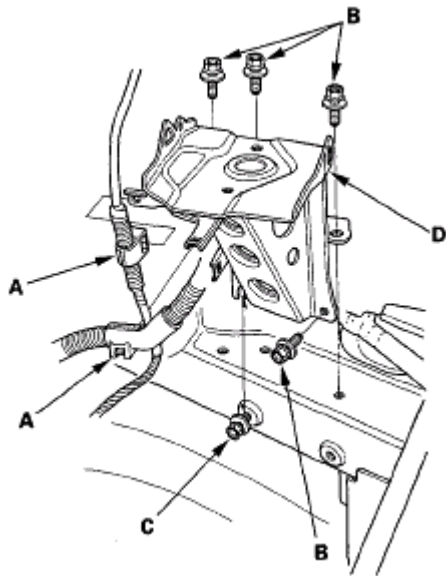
Identifying Harness Clamps, Vacuum Hose And Breather Pipe
